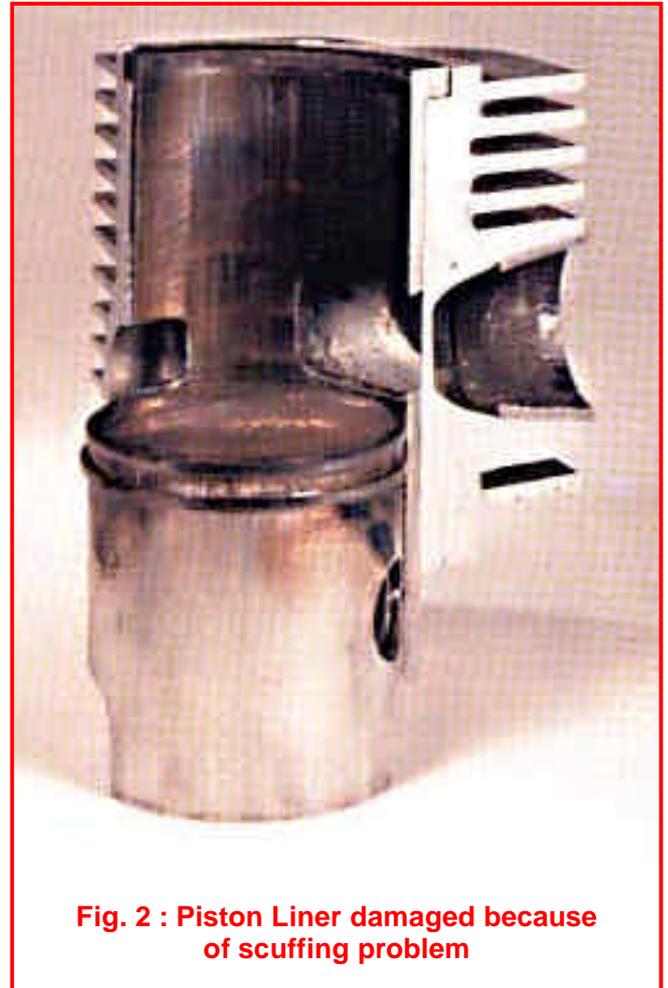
Piston Liner damaged because of scuffing problem
